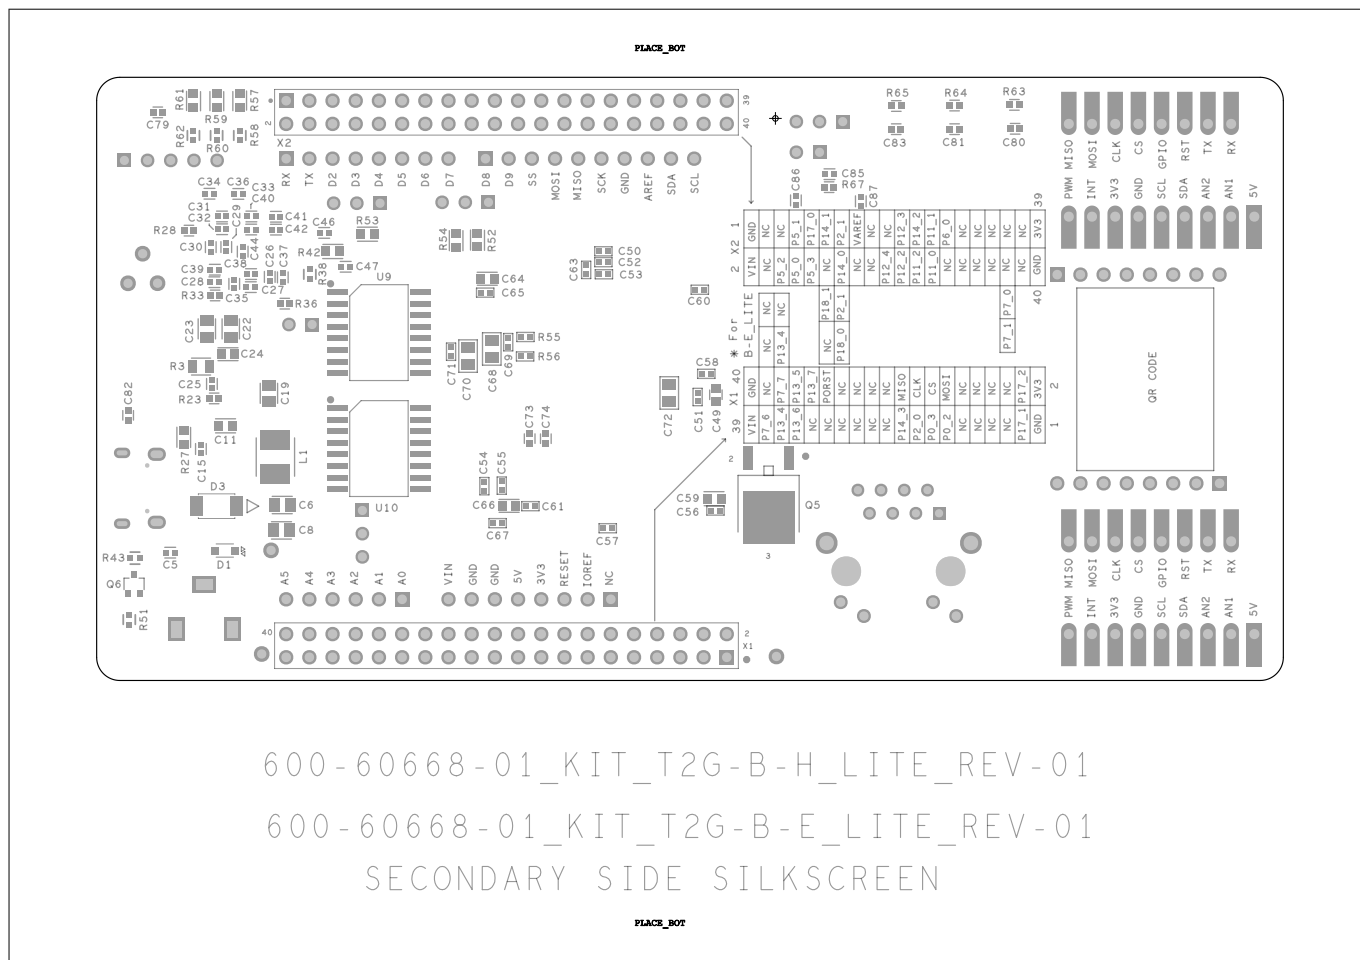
Secondary side assembly of TRAVEO™ T2G B-H Lite kit rev-01
